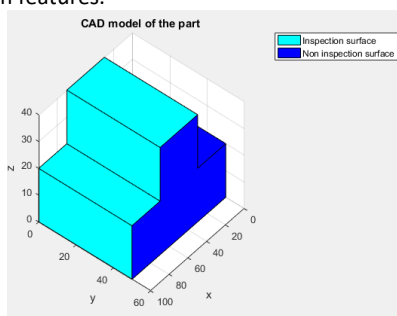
Inspection surfaces and non-inspection surfaces of the part.
